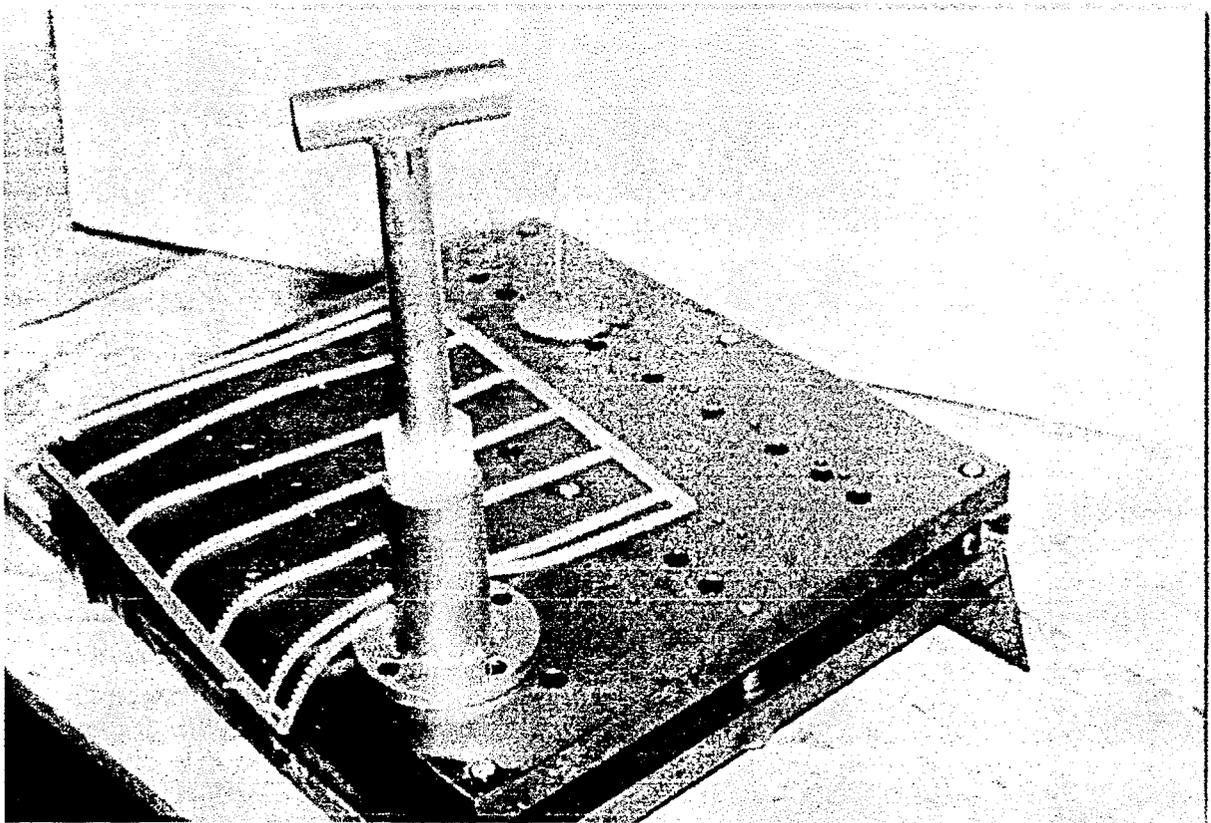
Casting mould for silicon spacer frame, showing injection plunger
